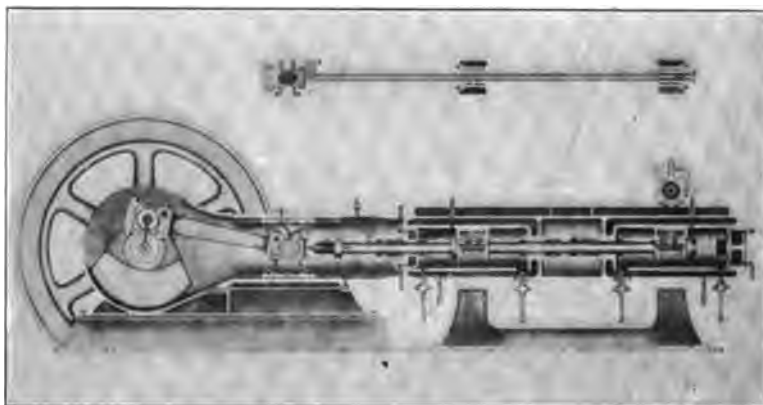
Cross-section of Snow Type B Gas Engine.
